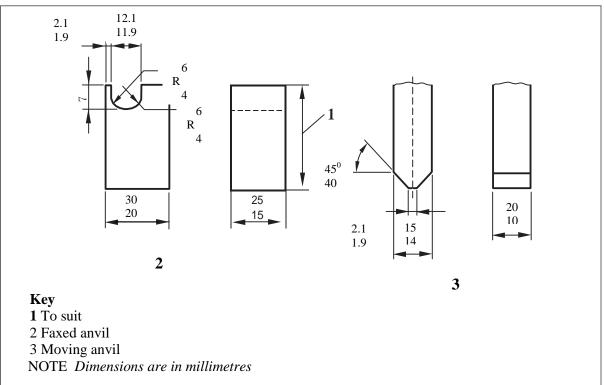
Apparatus for tests on plug pins: Details of anvils (see 12)
